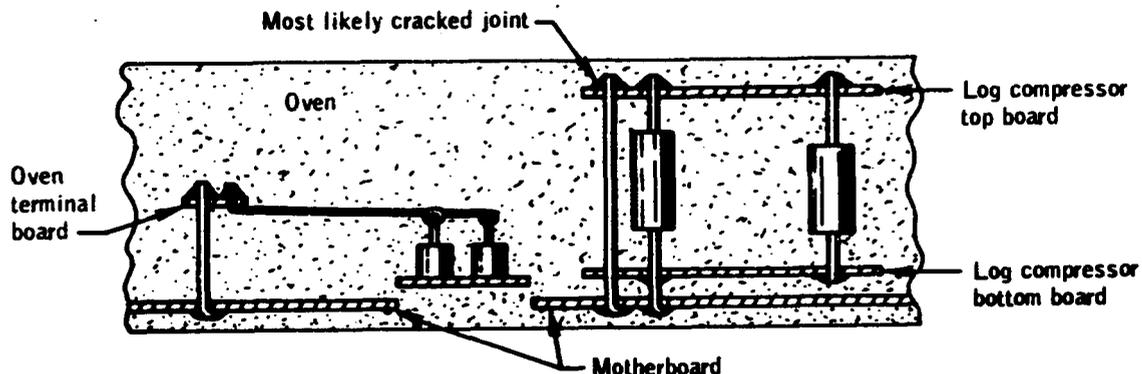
Suspected cracked solder joints in amplifier.
